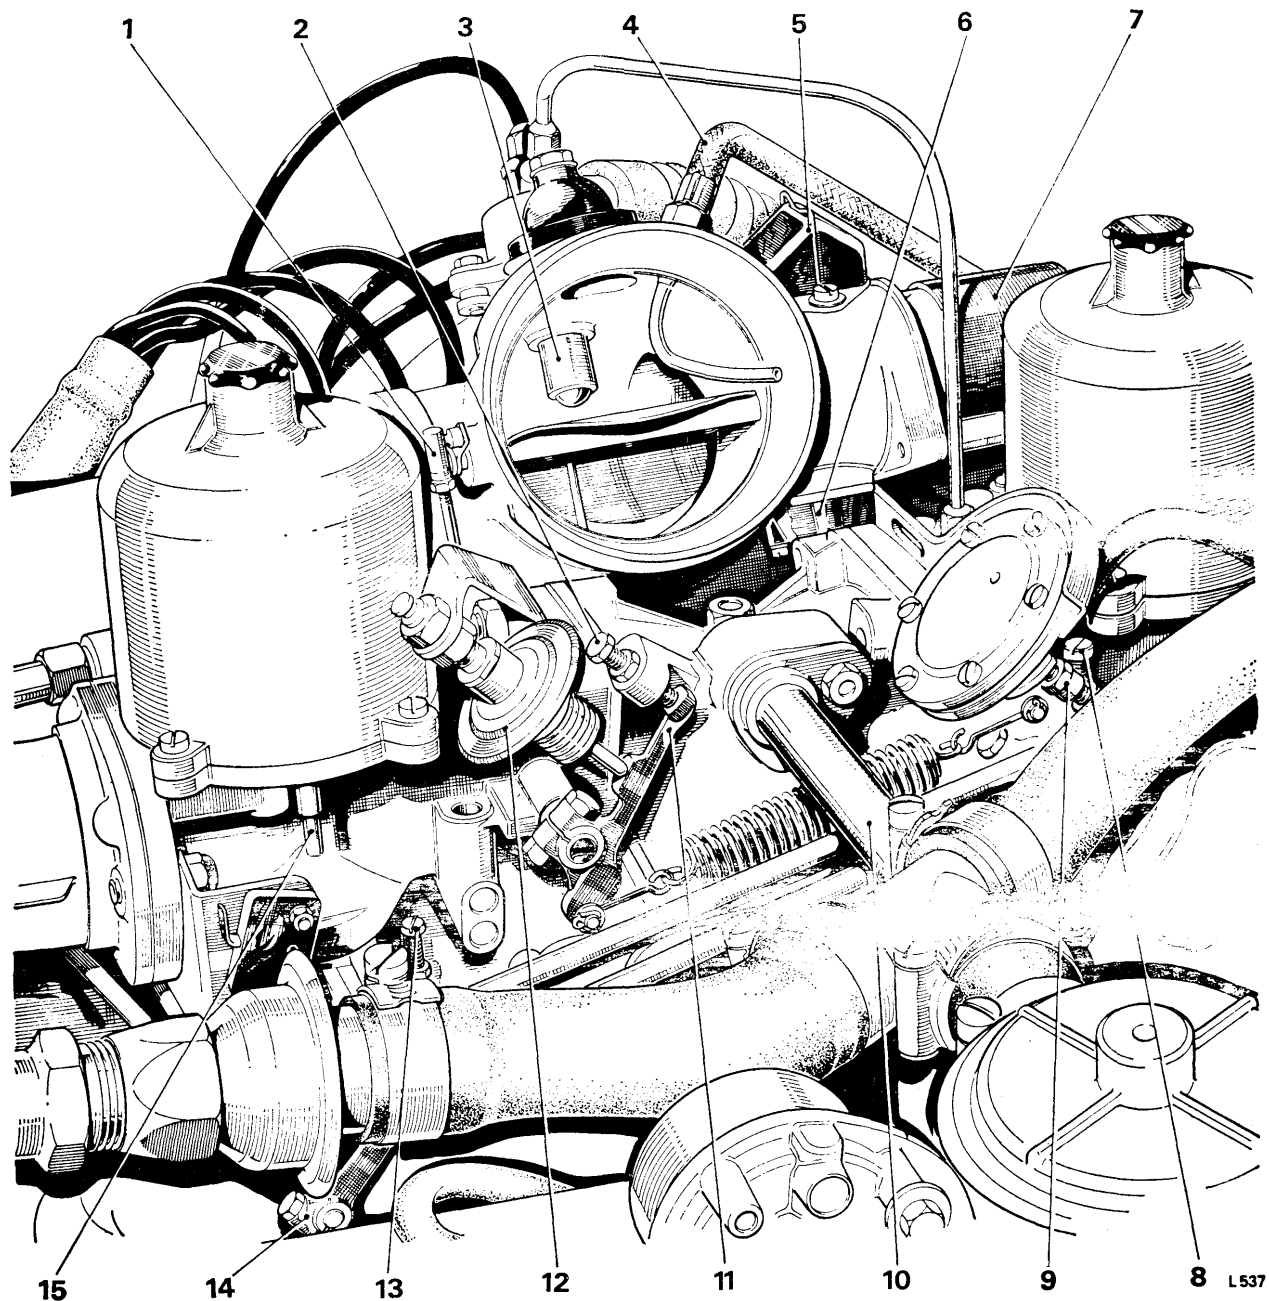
VIEW OF CARBURETTORS (Early Cars)
